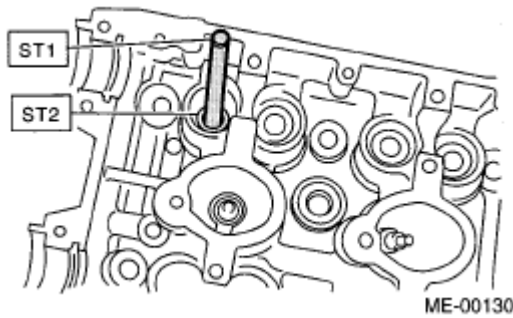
Identifying ST1 499767200 Valve Guide Remover
